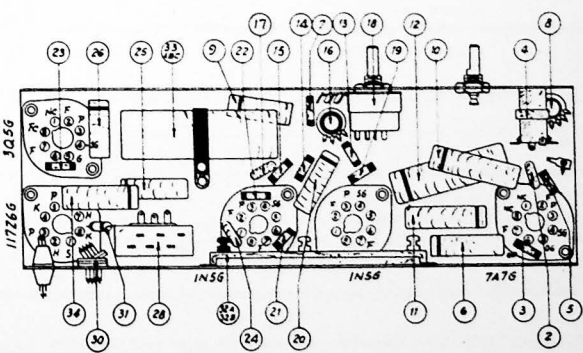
LOCATIONS OF PARTS, BOTTOM OF CHASSIS
